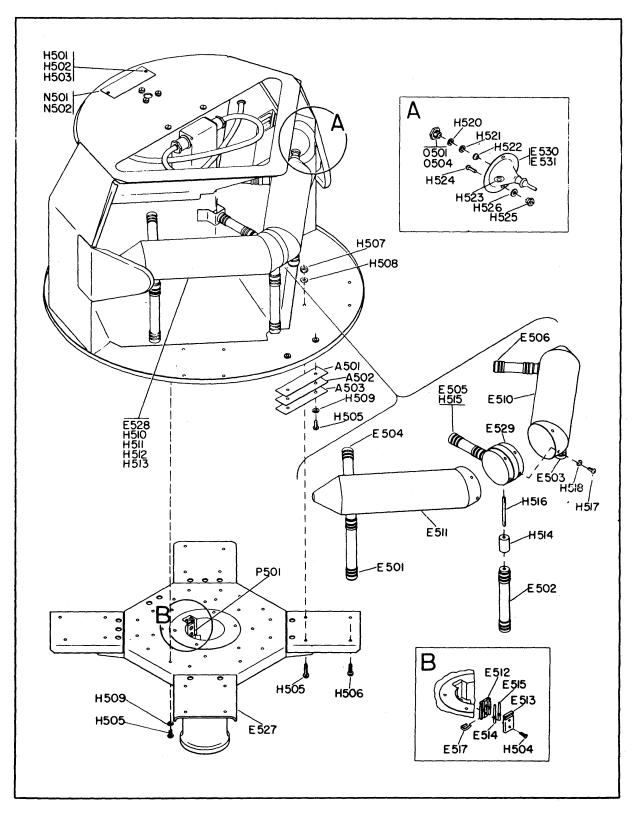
Antenna Assembly AS-435/APA-69 (Sheet 1 of 2)
